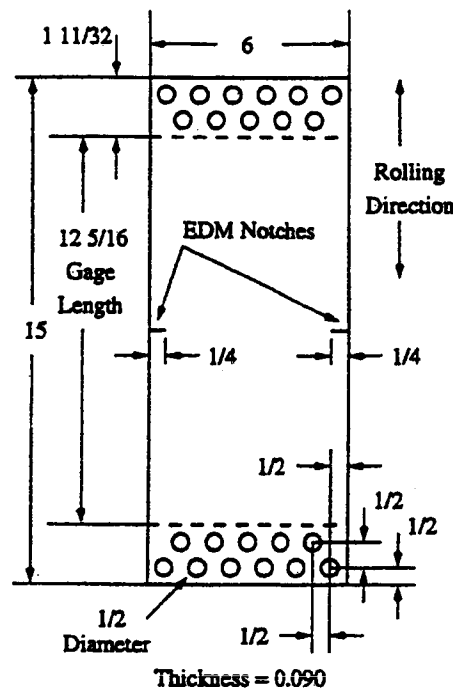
, Double edge notched tension torsion fatigue crack growth test specimen.
